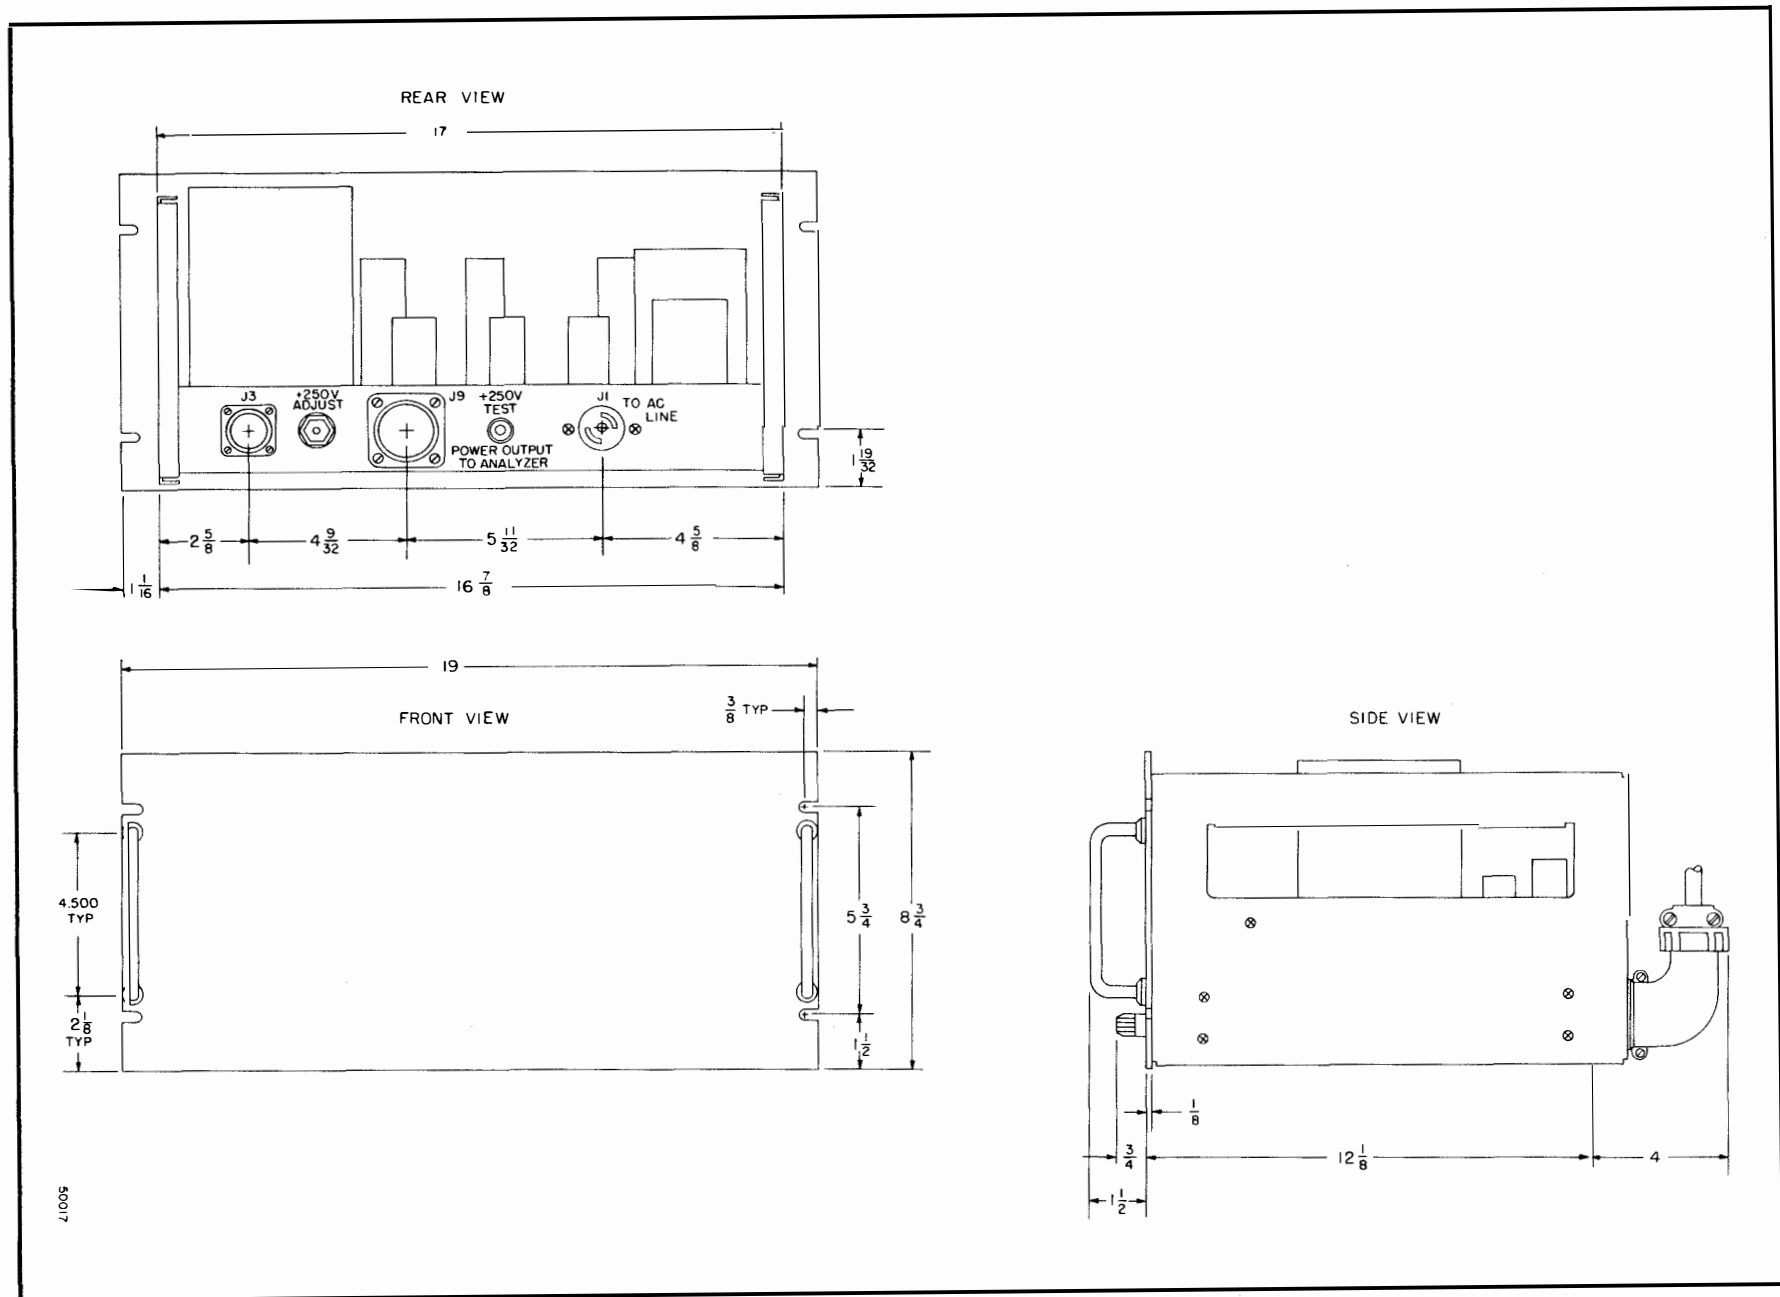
Outline Dimensional Drawing, Model PS-19, Rack-Mounted Style, Series 2
